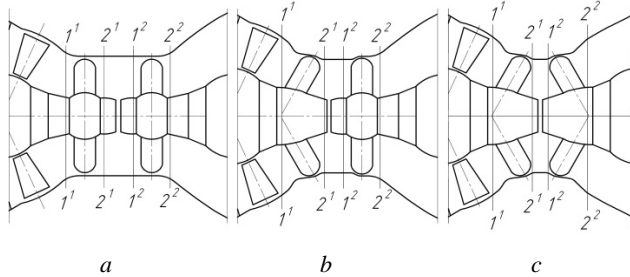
Schemes of the runner layouts and cross-sections of the twin bulb hydraulic unit:
